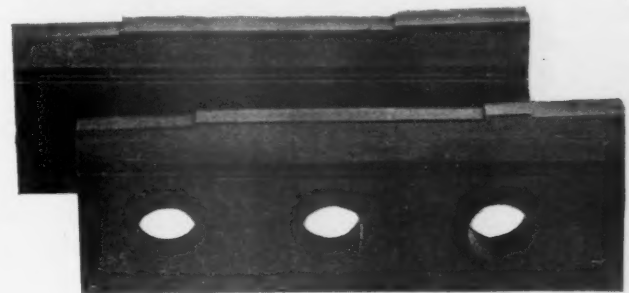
FORMING TOOLS USED ON WRIST PIN.
